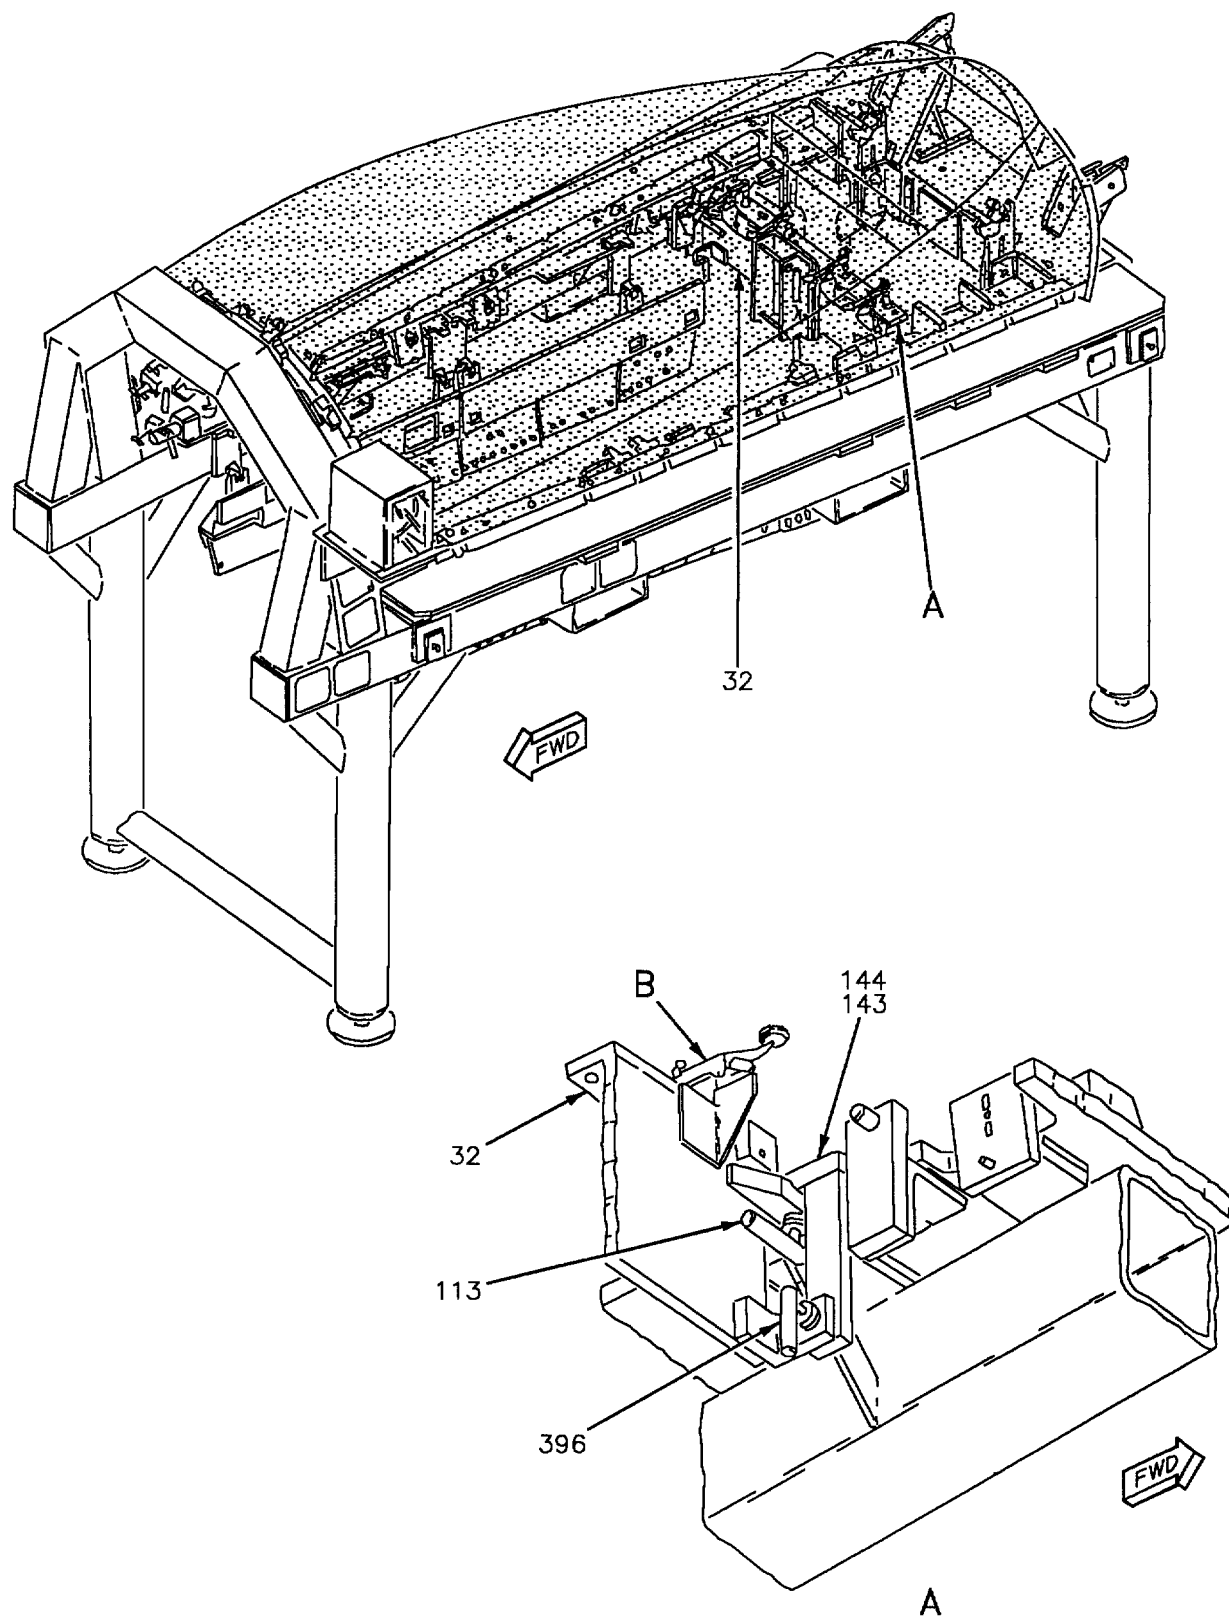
Inspection or Replacement - Aft Seal Retainer (Sheet 1)
